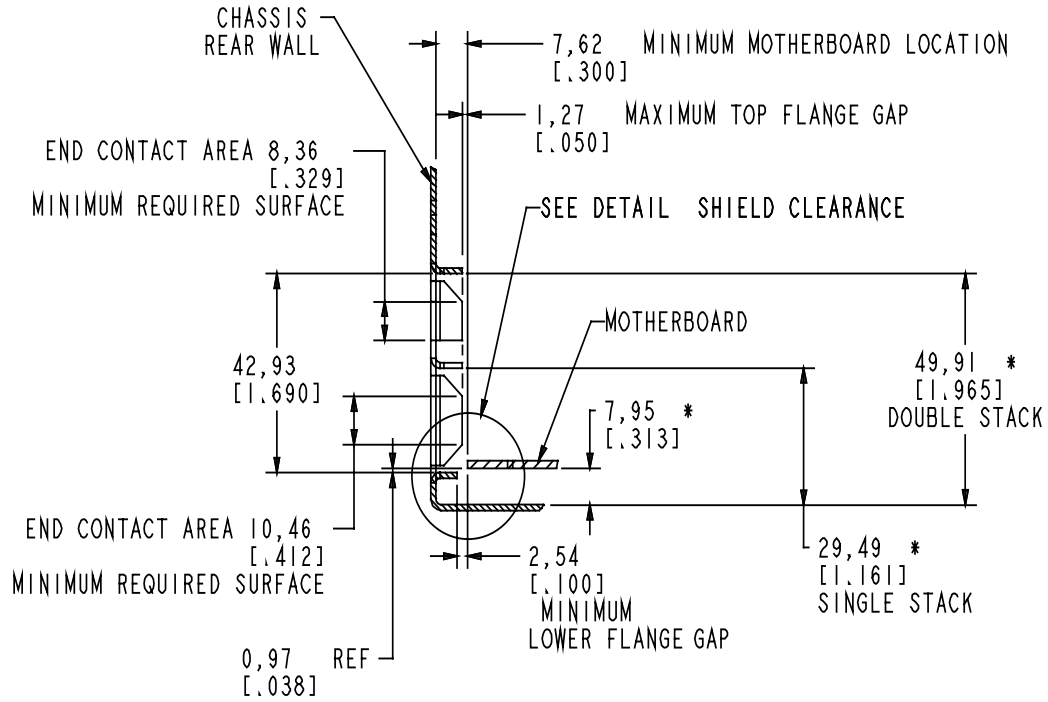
Dimensions of I/O Shield Opening from Chassis Bottom
